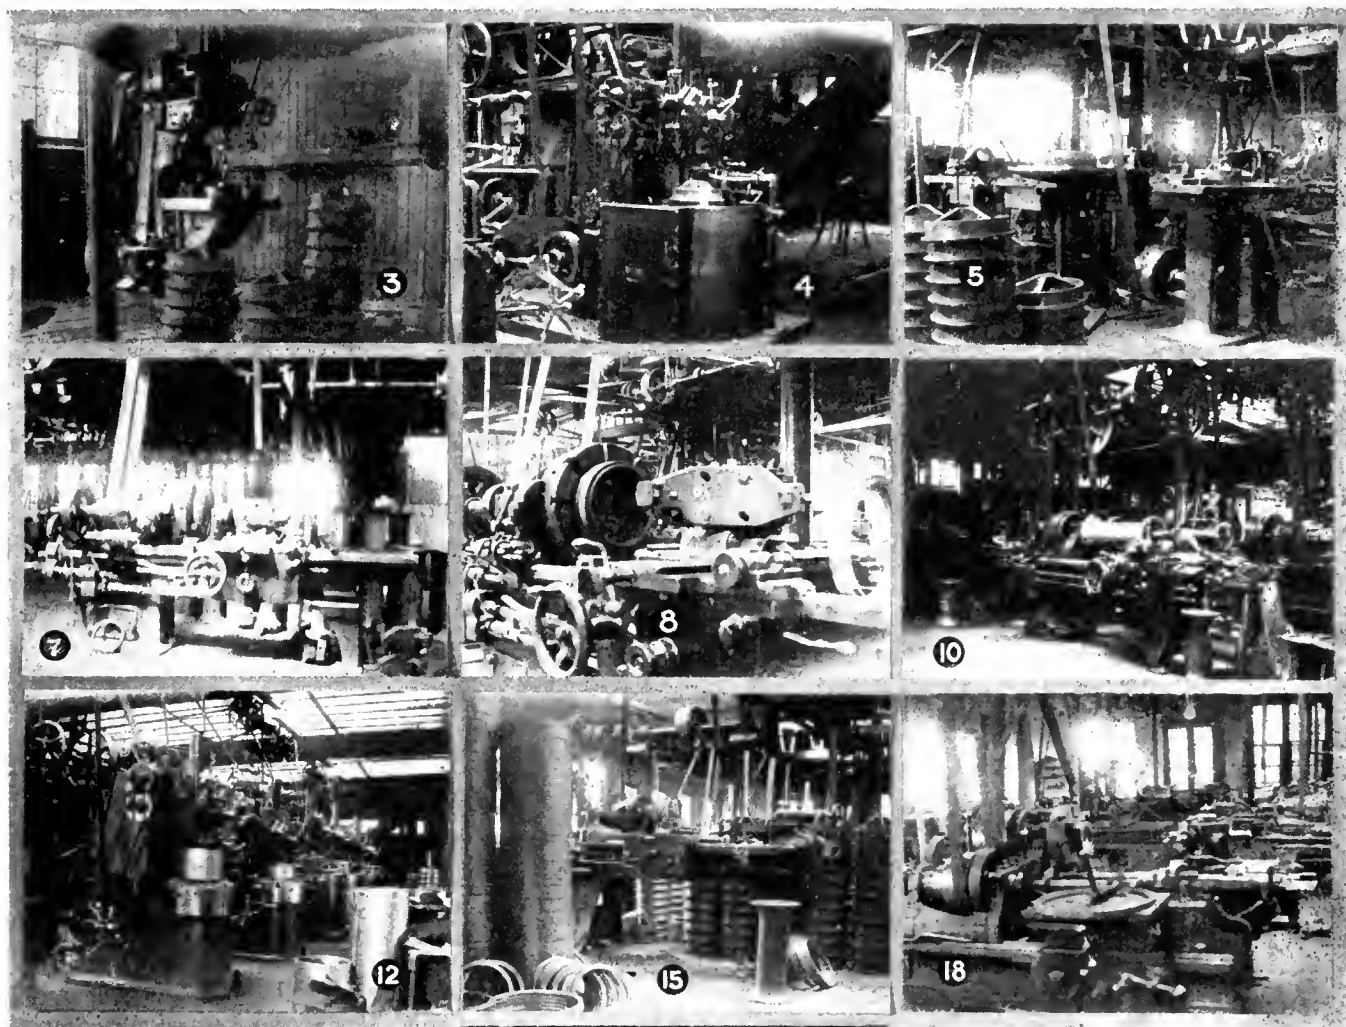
Rough drilling valve rod hole in follower on "Baker" drill.
